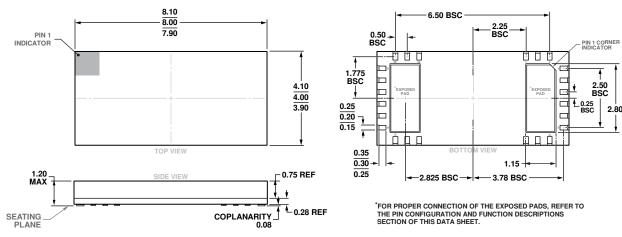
24-Terminal Land Grid Array [LGA] (CC-24-6) Dimensions shown in millimeters
